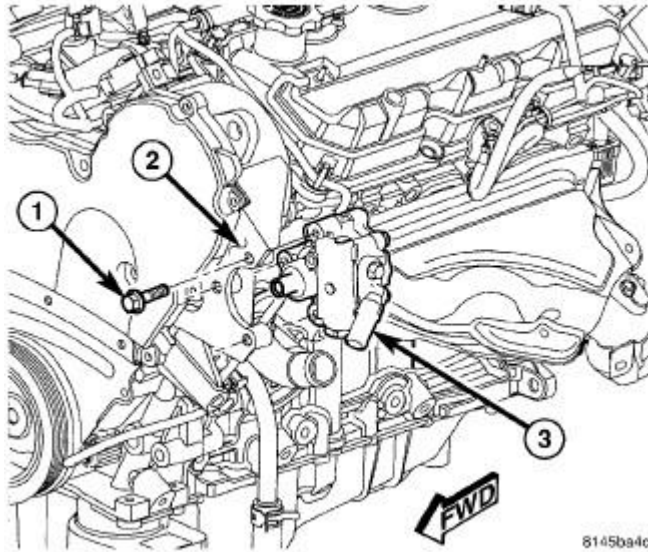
POWER STEERING PUMP - 2.7L/3.5L
